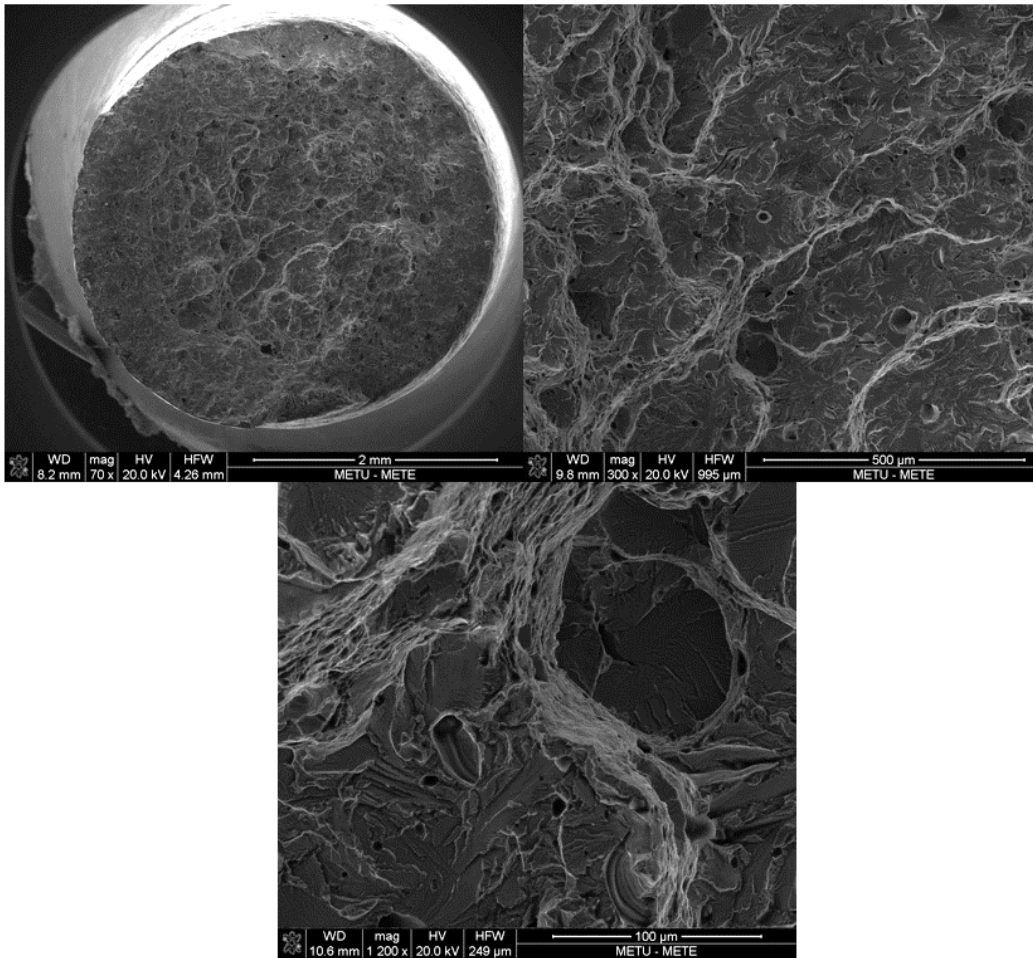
Fracture surface of specimen 1 obtained from production 10
